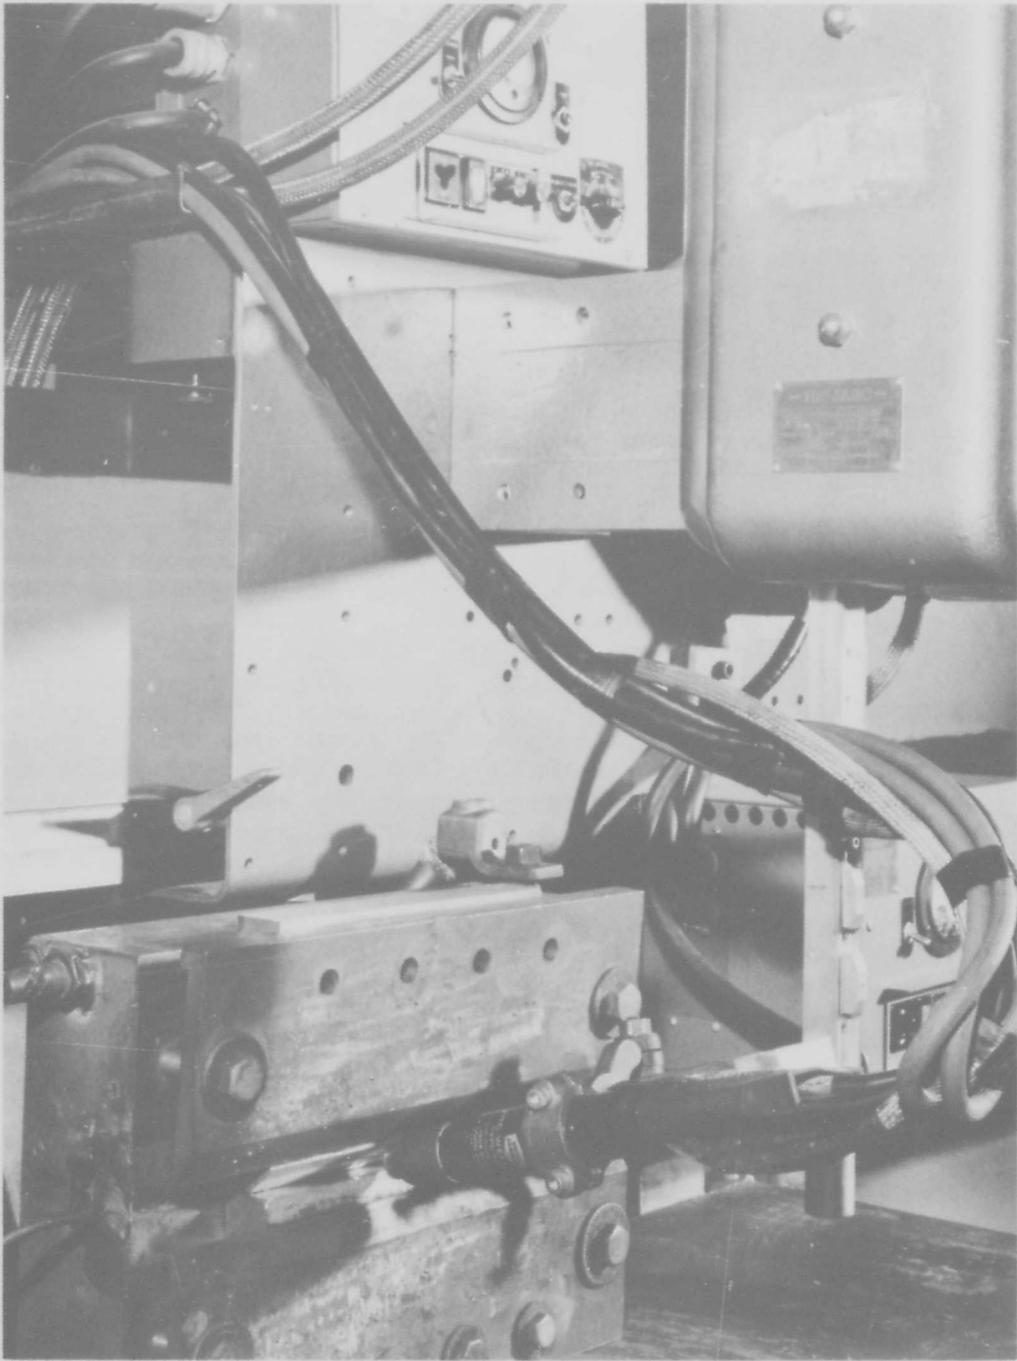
Heliarc Torch in Position for Horizontal Welding.
